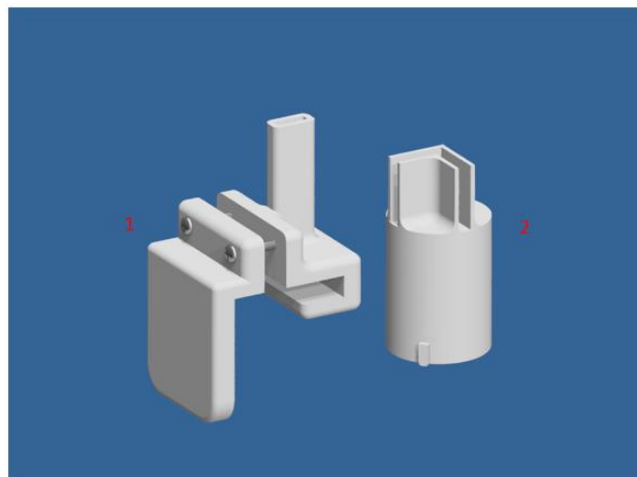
CAD drawings of the parts that were used to evaluate the X-axis motion of the robotic device.
